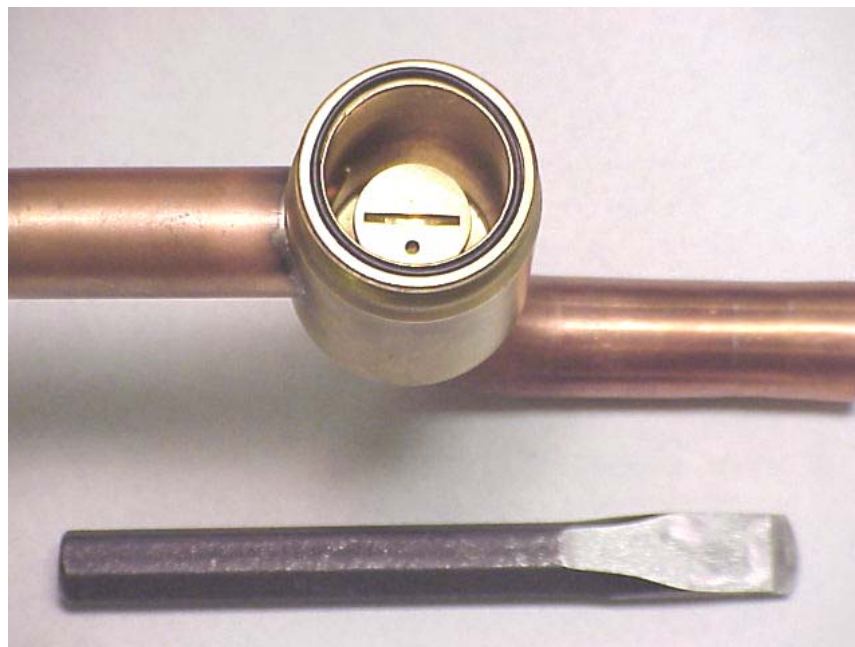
EXV Orifice and TS429 Orifice Removal Tool
